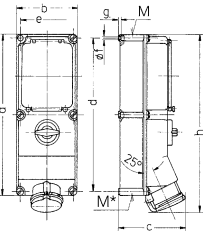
MB 181/620	Amp. Poles	16			32			63
